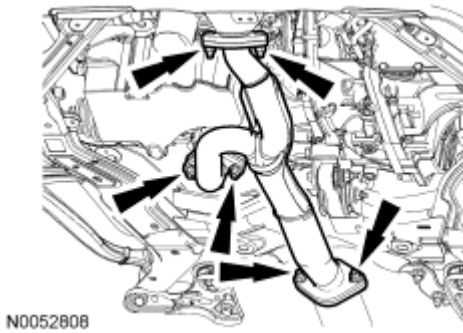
Locating Y-Pipe Nuts & Y-Pipe Assembly
